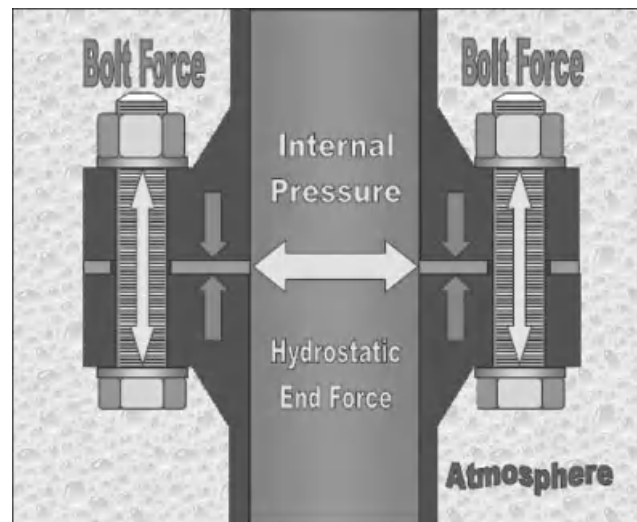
Forces acting in a flange gasket joint assembly. (Courtesy of Garlock, an EnPro Industries family of companies.)
